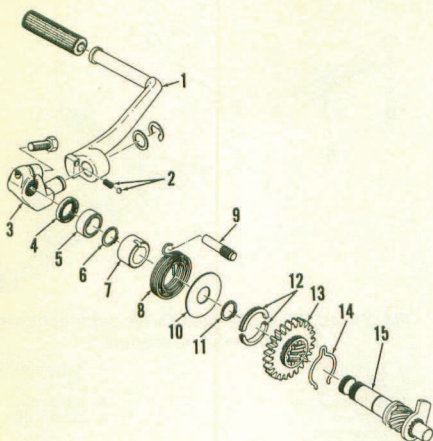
Exploded view of typical kickstarter assembly.
